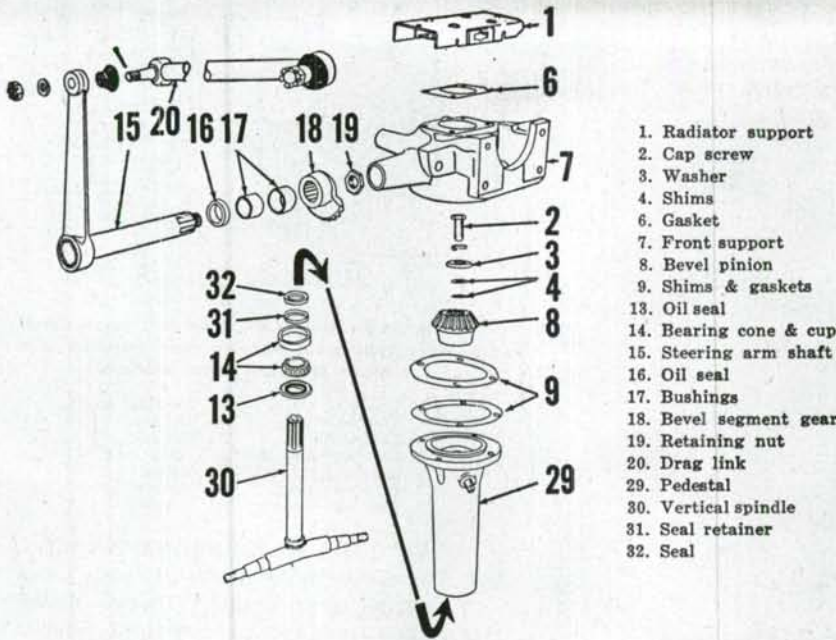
Models C and CA dual wheel tricycle version front support, pedestal, and front steering gear assembly.
